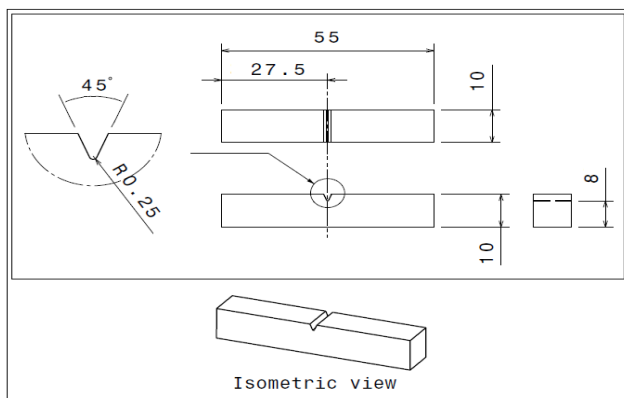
Standard Charpy V-notch impact specimen with dimension.
